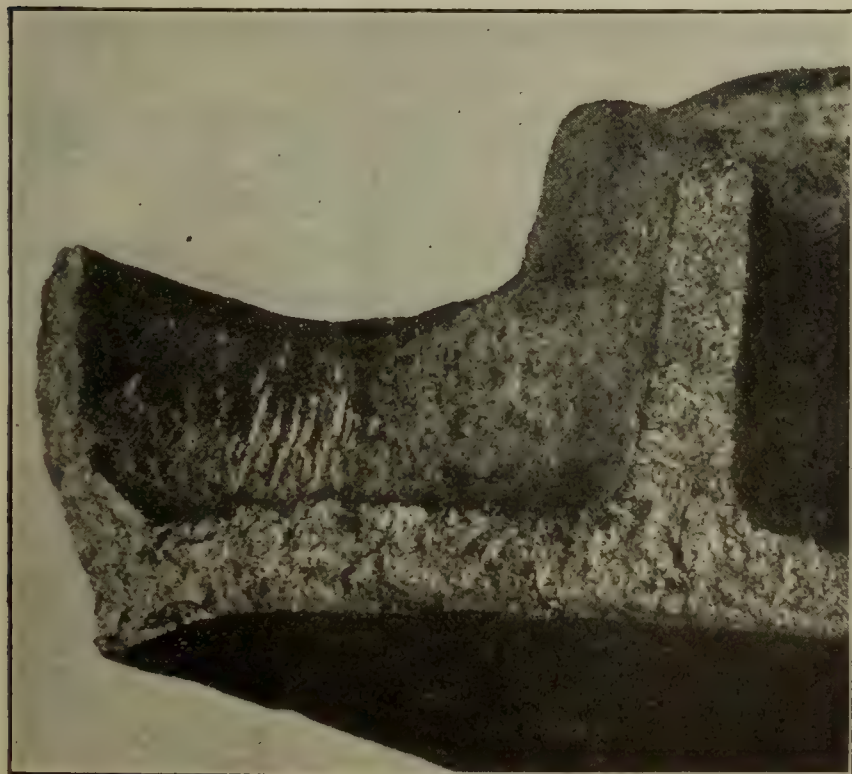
FRACTURE OF UNTREATED NICKEL STEEL CASTING
